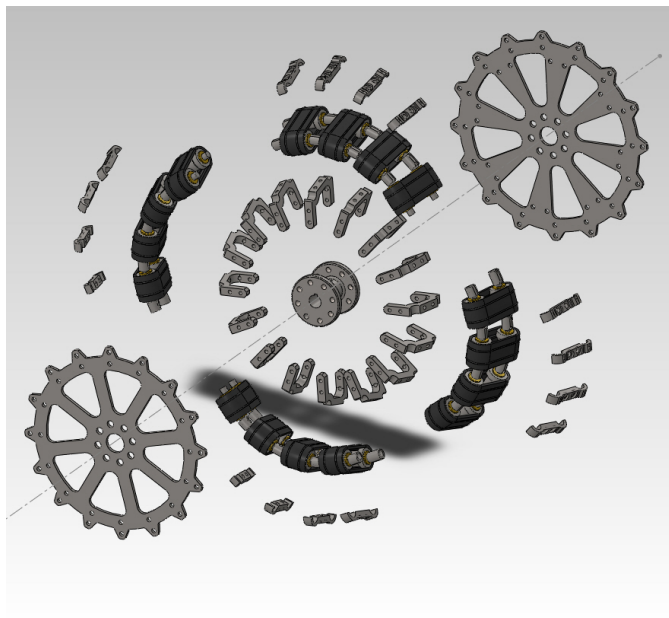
Exploded view of the inner layer of the wheel concept.
